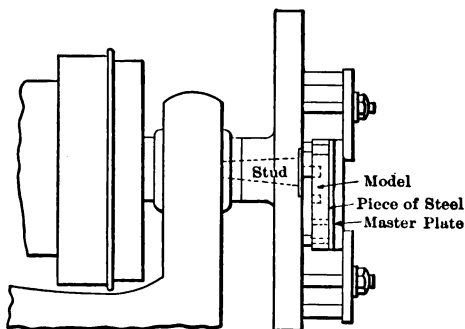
Parts Shown in Fig. 7 Swung in Lathe.
